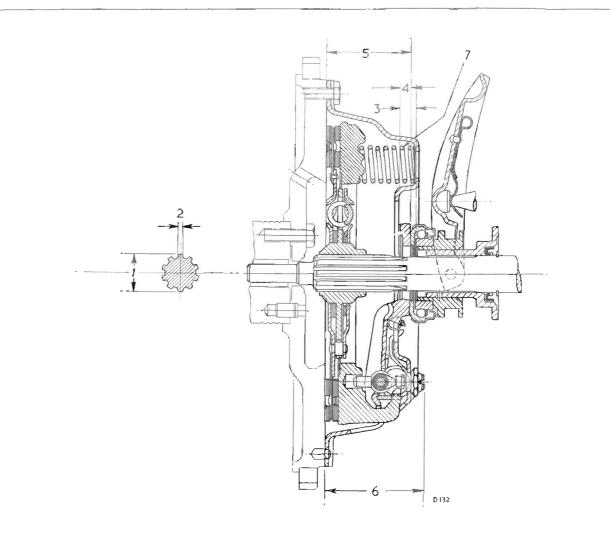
Section of clutch (Vitesse) and gearbox unit. The gearbox is identical for the Herald 1200, 12/50, Vitesse and Spitfire
